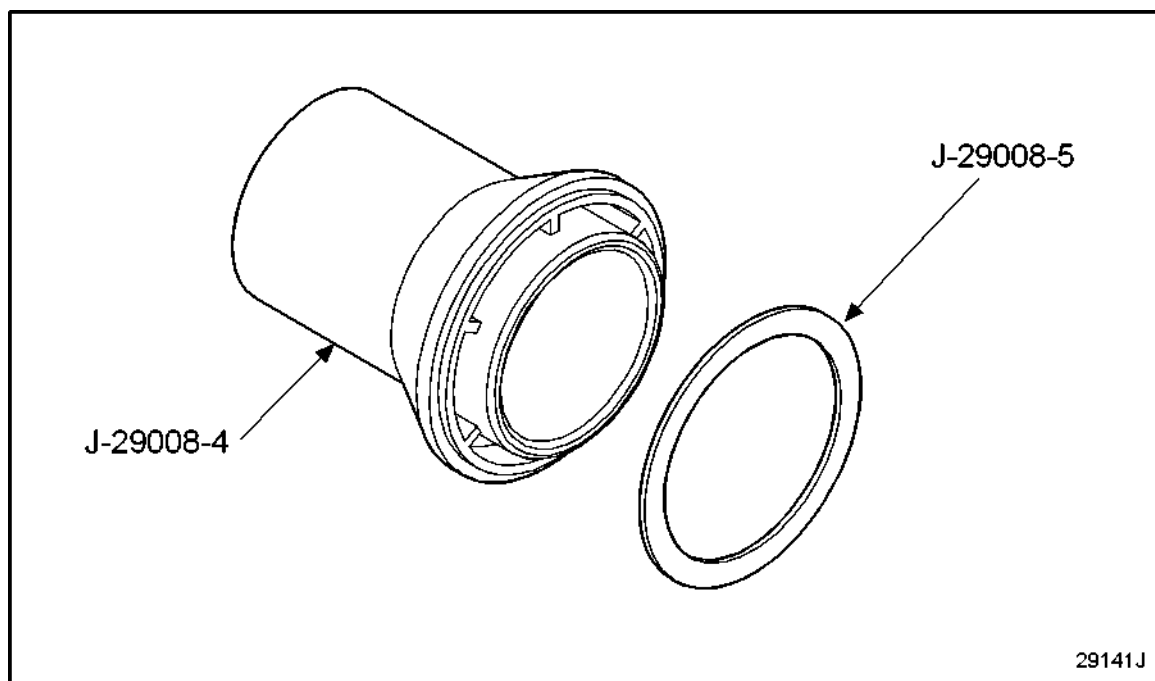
Front Seal Installer (STD Seal),J 29008-B
